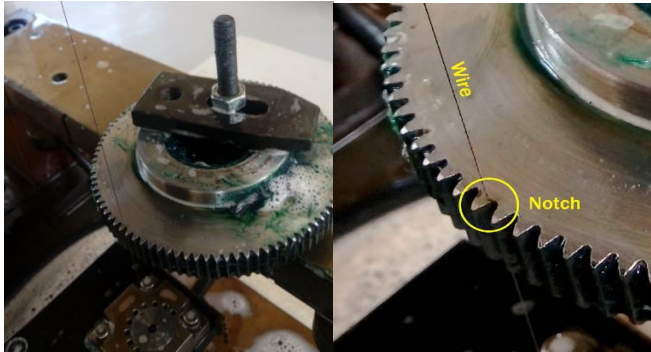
Process of machining a notch in a gear tooth using wire EDM.
